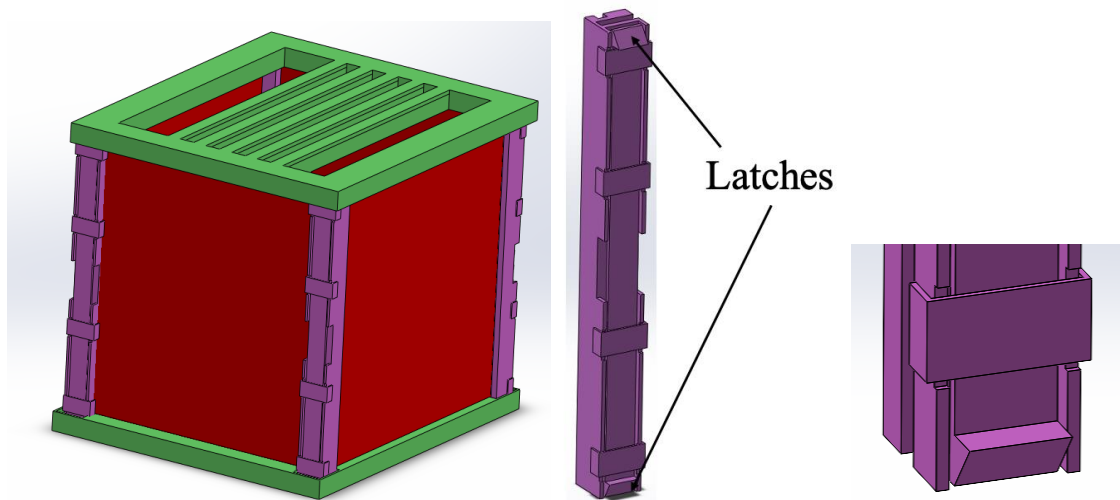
The first structure considered in its entirety (a); with its rails and latches (b); and with detail on its latches (c).
